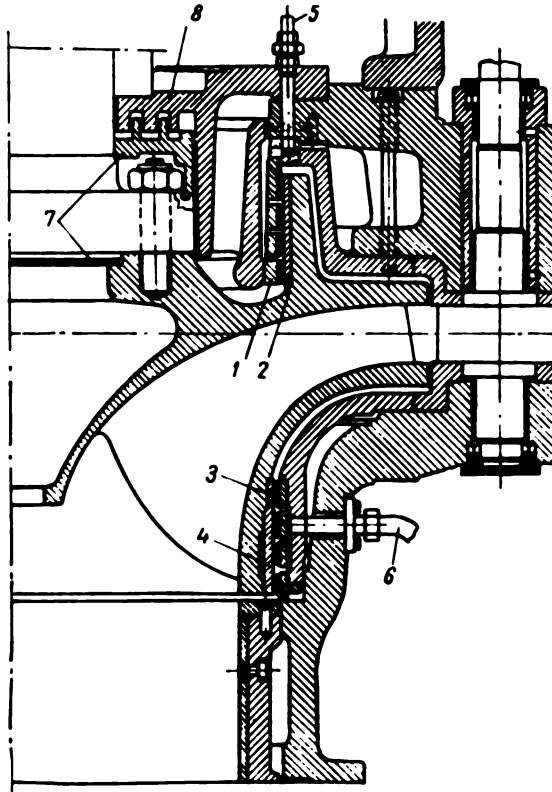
High-head turbine seals with rubber-lined surfaces
